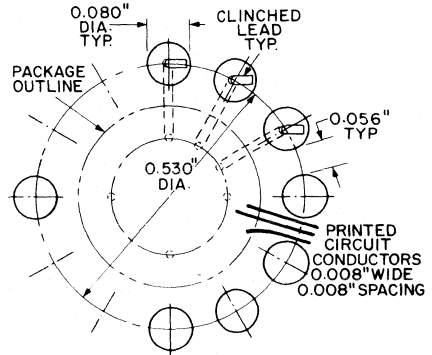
Radially offset mounting pattern for RCA 12-terminal TO-5-style package.
